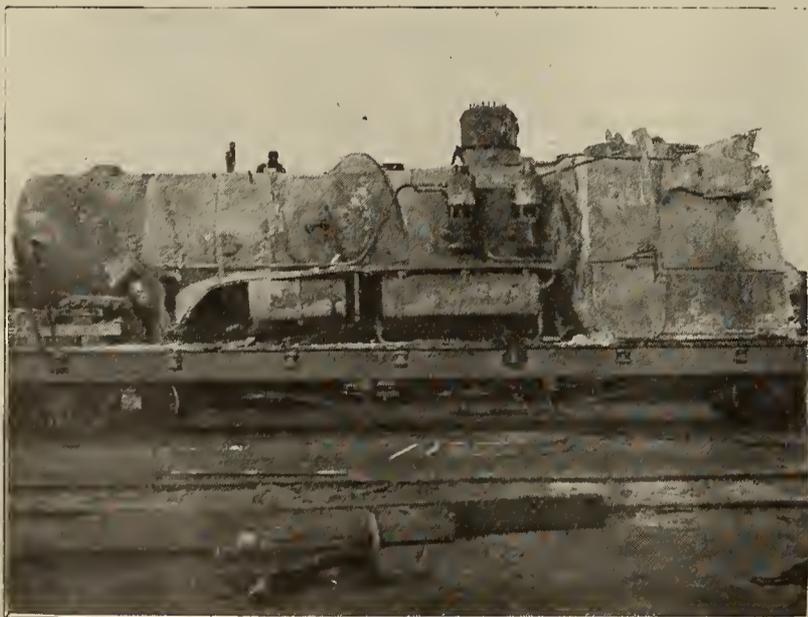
BOILER IN WHICH CROWN SHEET WAS DROPPED, LOADED ON FLAT CAR AFTER EXPLOSION.
